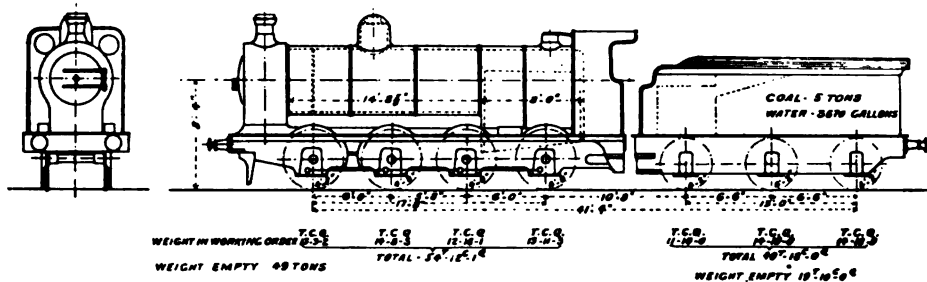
G.N.R. Eight Wheels Coupled Goods Engine. (Cylinders, 20 in. by 26 in. stroke.)
